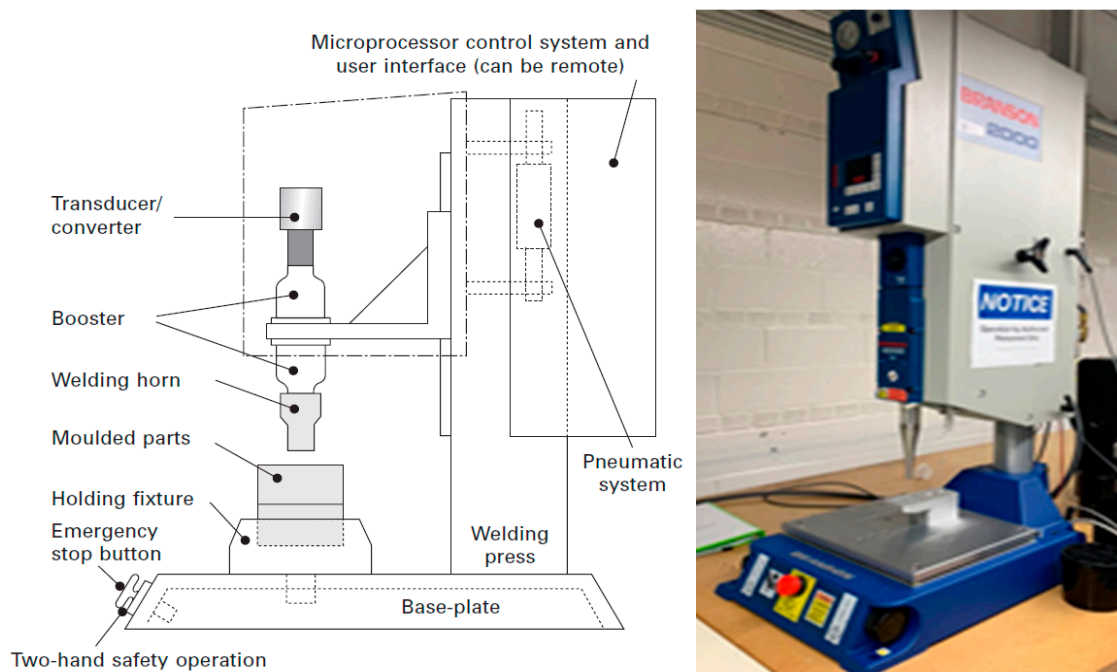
Schematic of the ultrasonic welding machine, displaying its key features [9] (left); Photograph of the ultrasonic welding machine (right).
